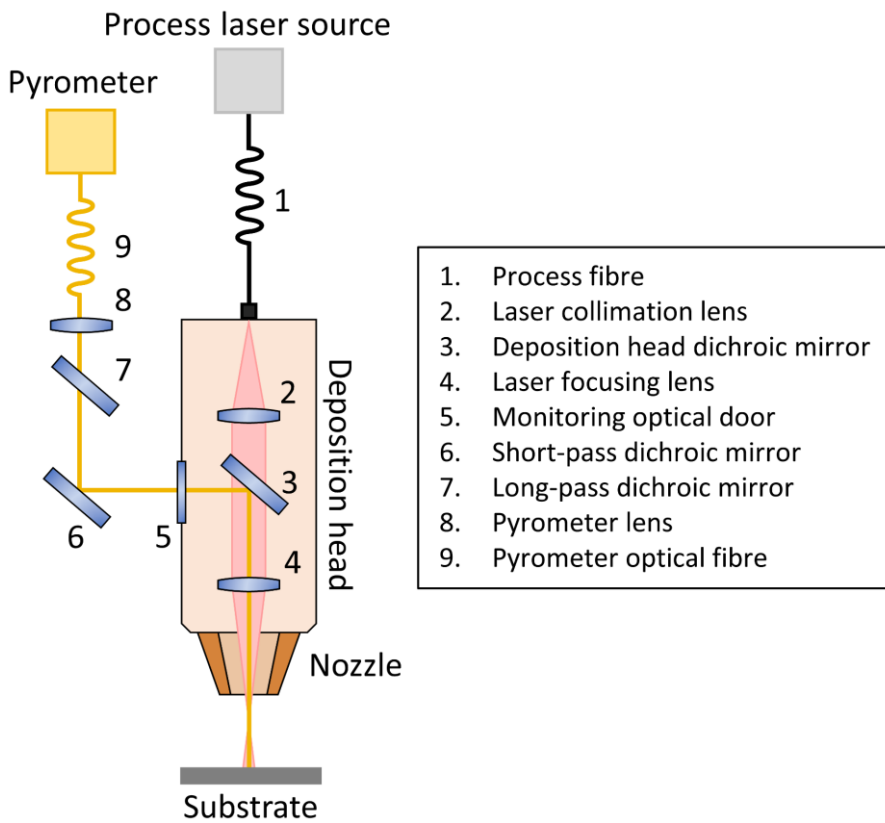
Optical scheme of the pyrometer setup coaxially integrated on the deposition head.
